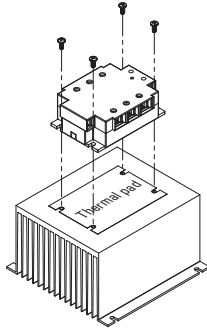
GN3 Series SSR mounted on HS053 heat sink
